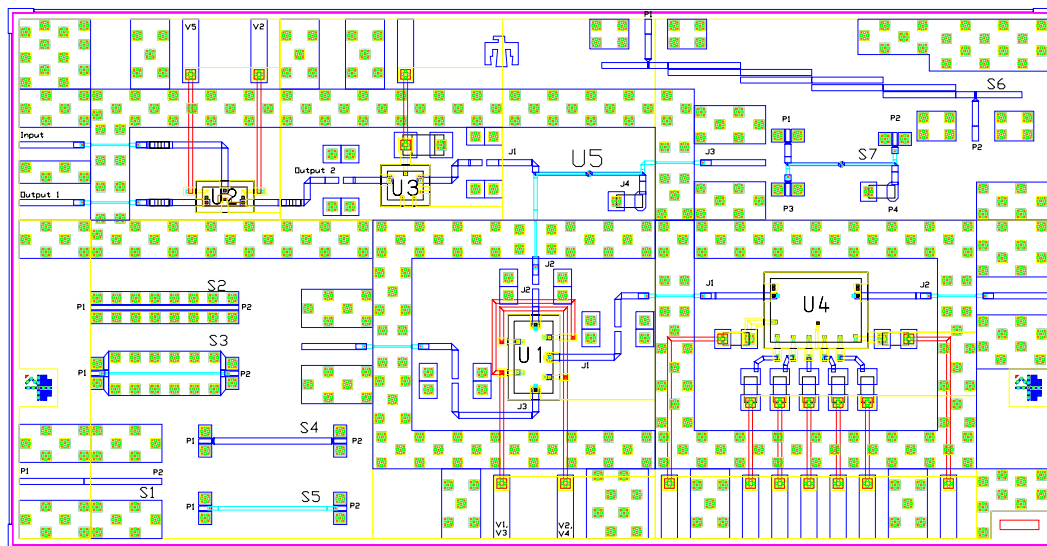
AutoCAD drawing of HDI module with circuit symbols
